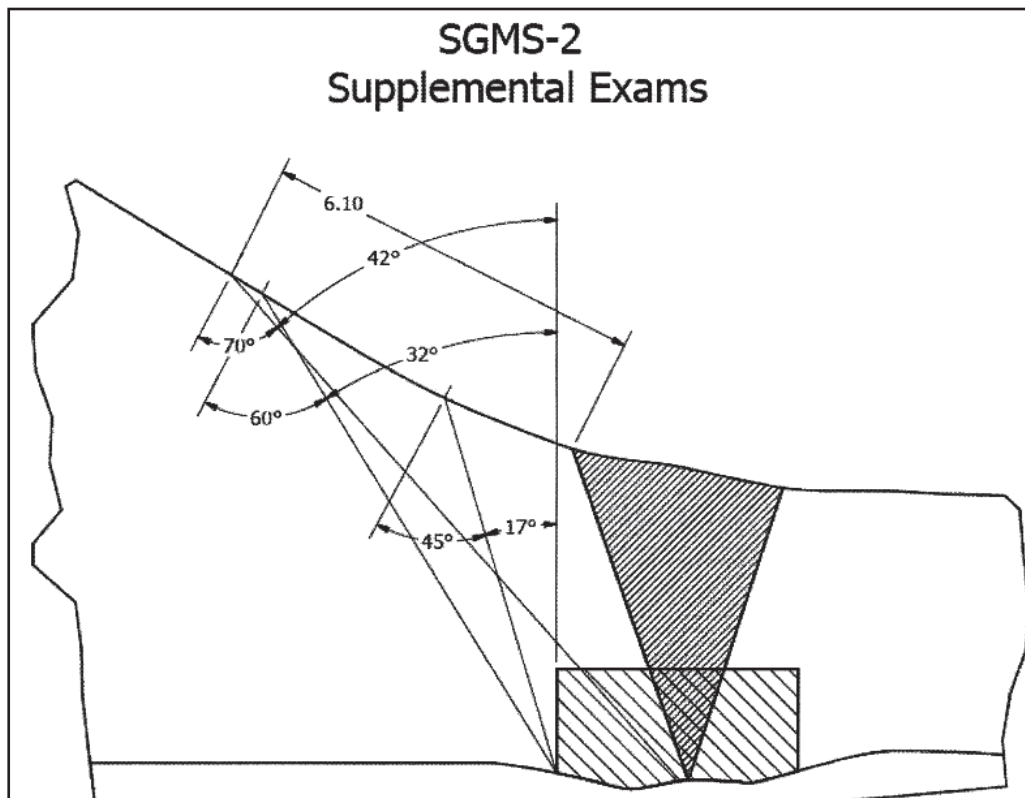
Weld SGMS-2, 45°, 60°, and 70° Nozzle Side Axial Scans – Supplemental Exams
